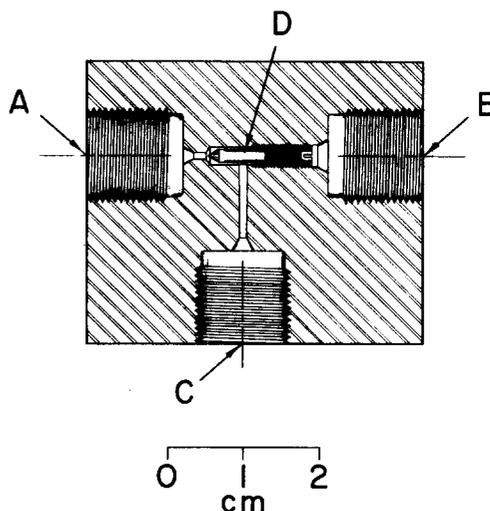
Small valve. Ports A, B, and C are each tapped to accept a $\frac{1}{4}$ -20 gland nut. The 0-80 steel screw is identified as D.
